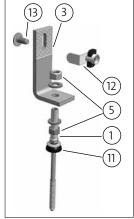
Oc Solar fastener with FZD seal and angle flange
